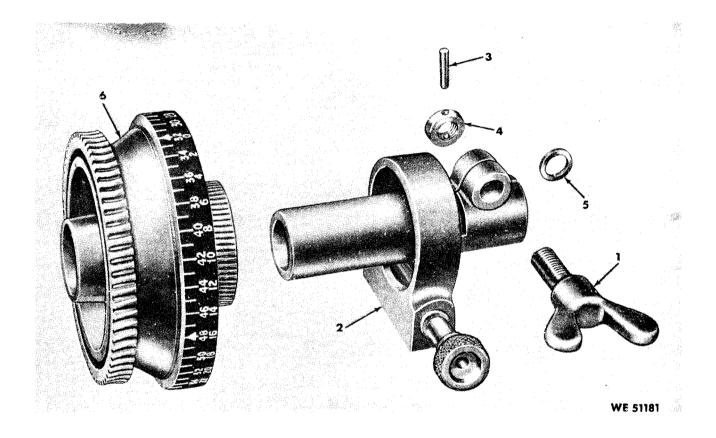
Orienting mechanism and housing assembly partial exploded view.
